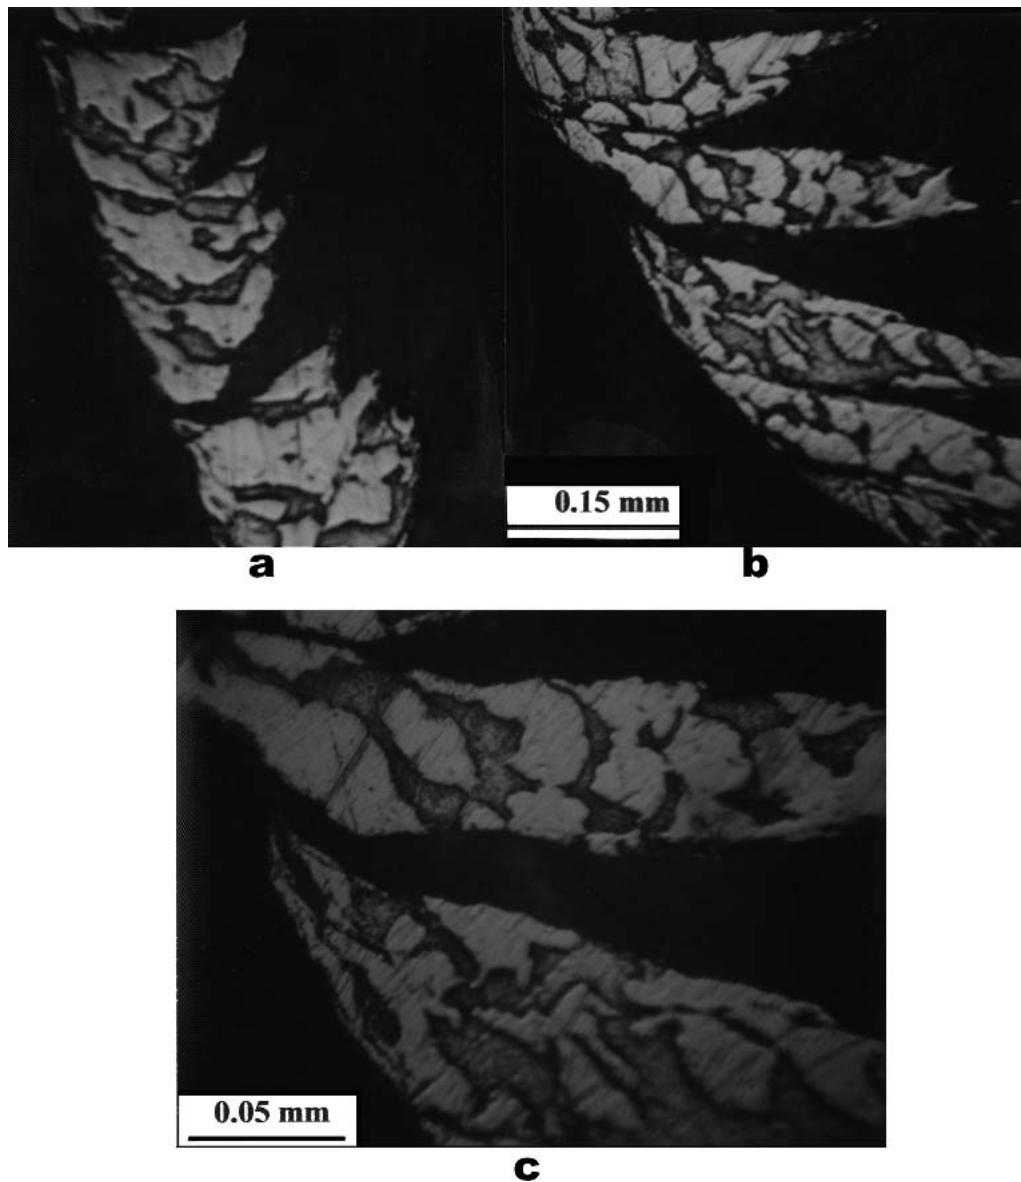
(a) Segmented and (b) intensively fractured chip morphology without characteristic flow zone; (c) detail of Fig. 6(b) in the vicinity of the shear zone (depth of cut: 3.0 mm, feed rate: 0.25 mm/rev, cutting speed: 0.165 m/s)
